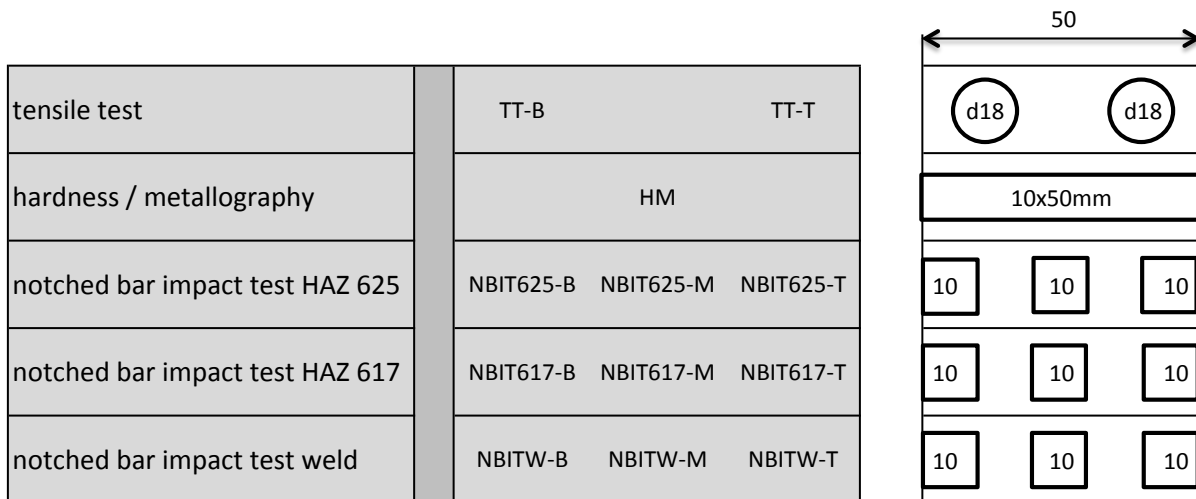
SPECIMEN LAYOUT EBW WELD
